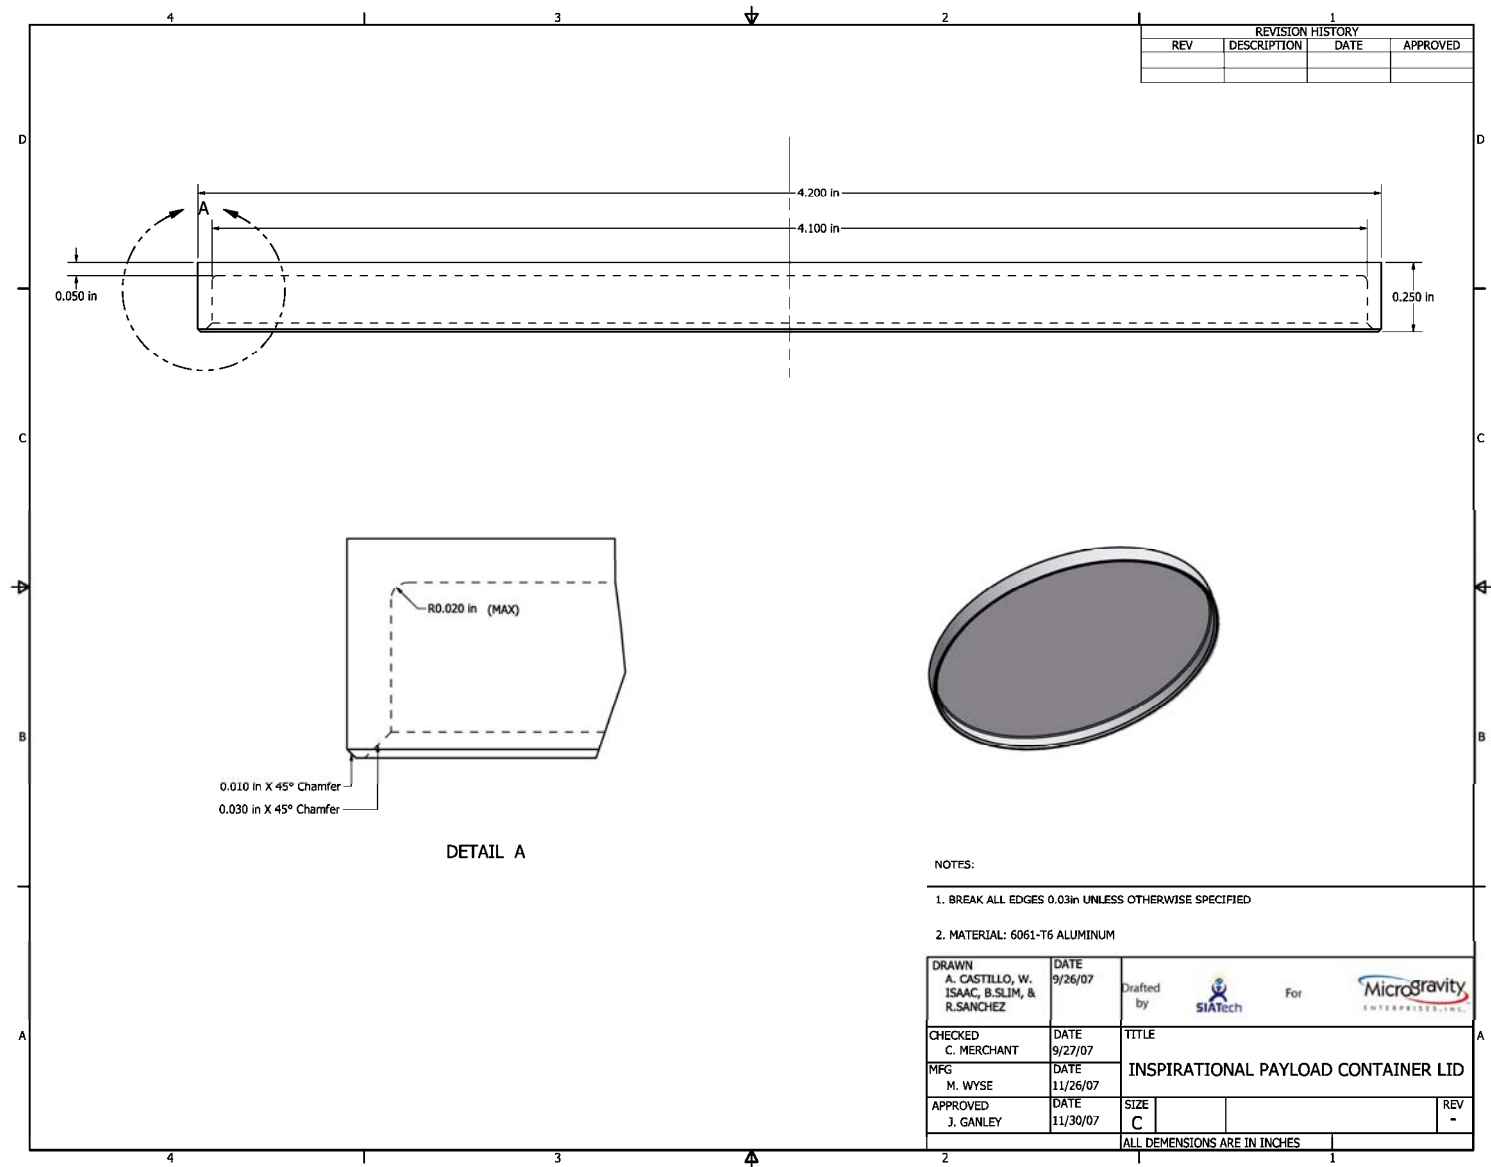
Recommended Inspirational Payload Container Lid Drawing
